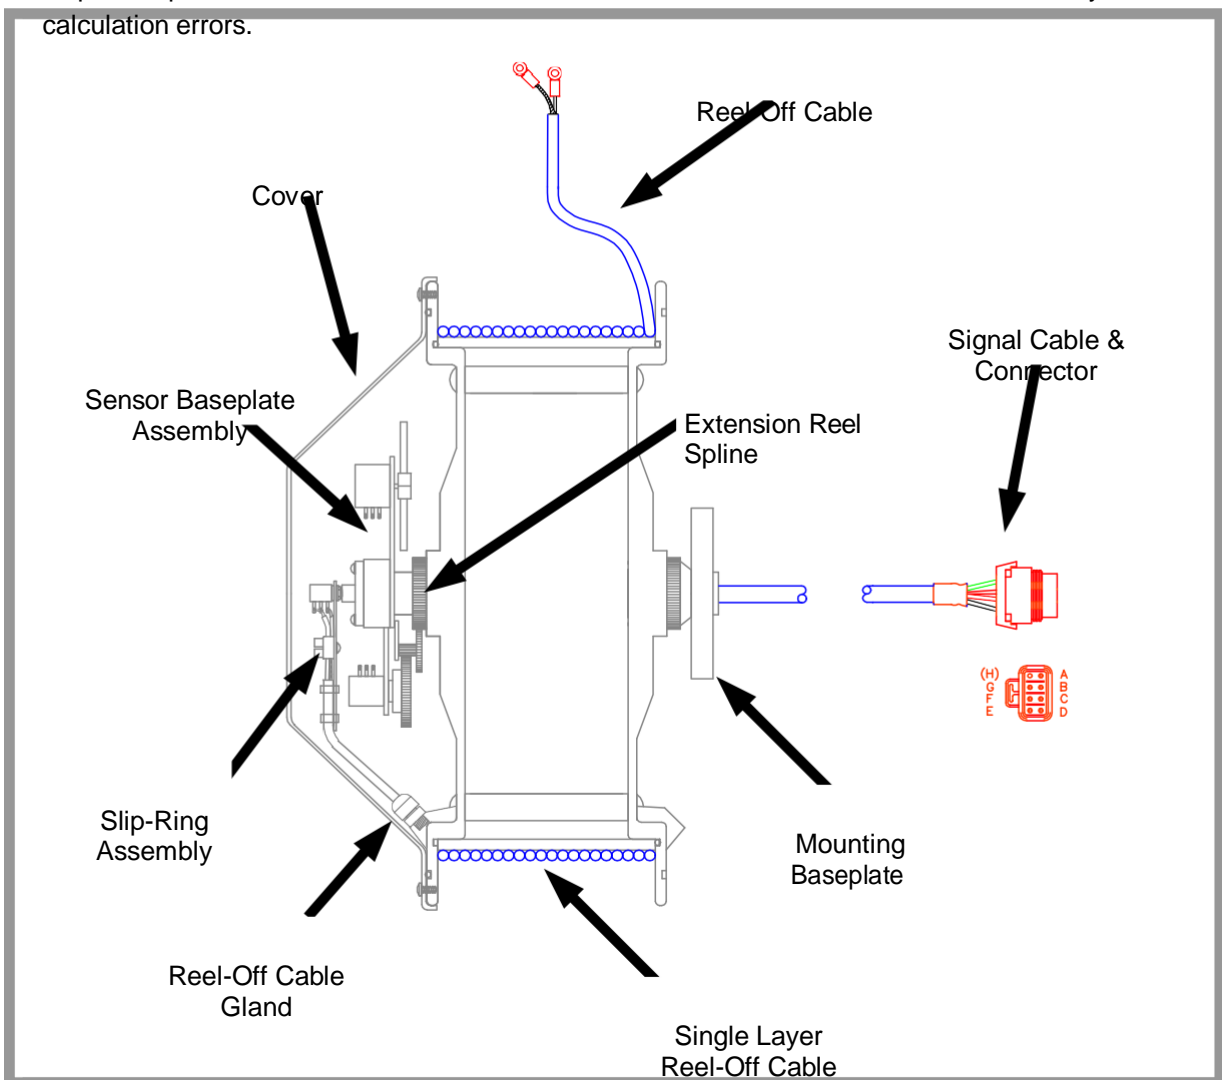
EXTENSION REEL CUT-AWAY DRAWING
